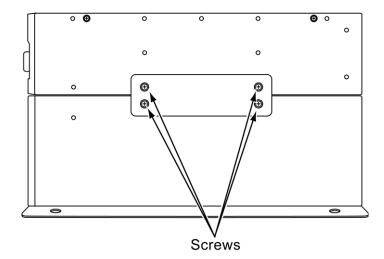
Install CHS2U JOINT BRACKET KIT
